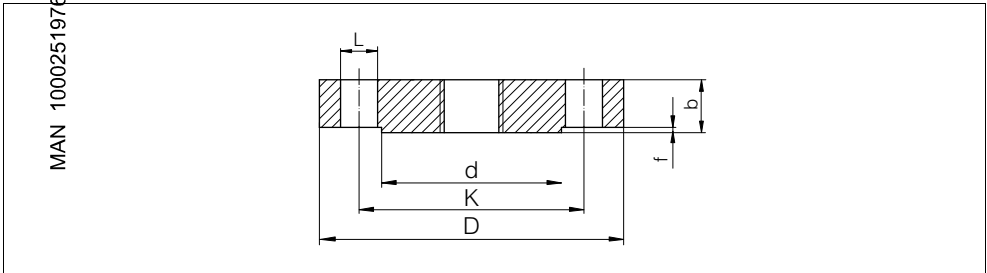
Dimensions - ASME flange B 16.5 (seal ledge RF)
